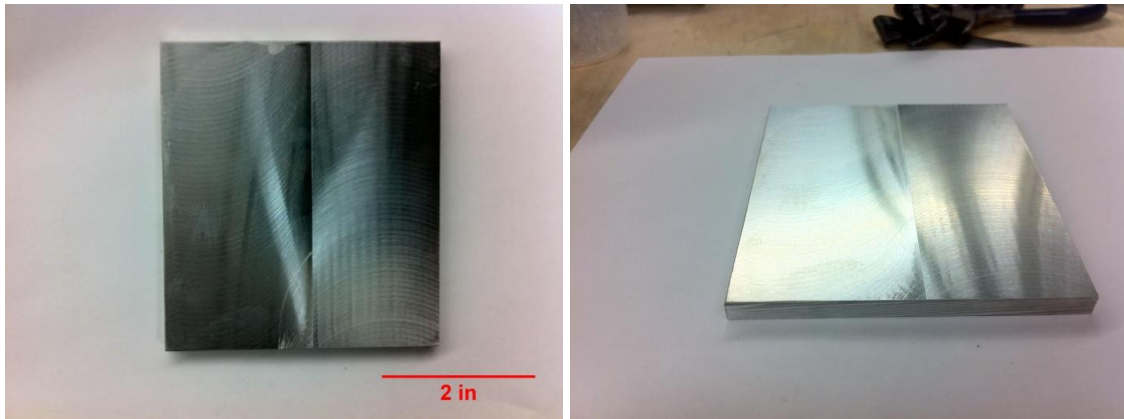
Machined CGDS aluminum 7075 Taber abrasion panel.
